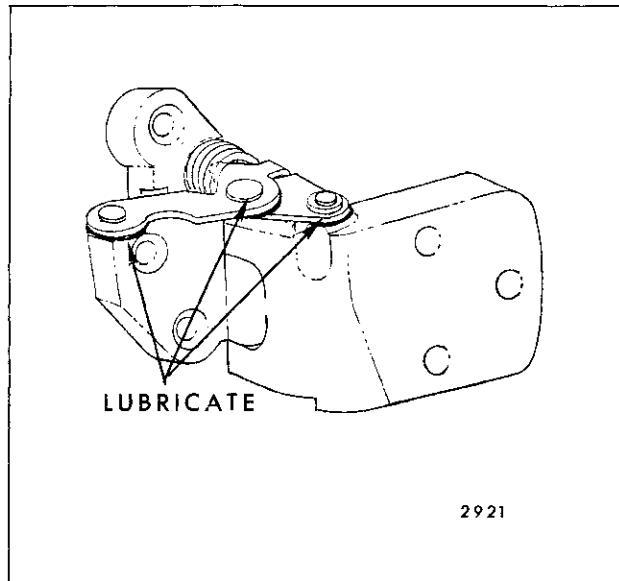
Rear Door Hinge Assembly - "B" Body Styles
